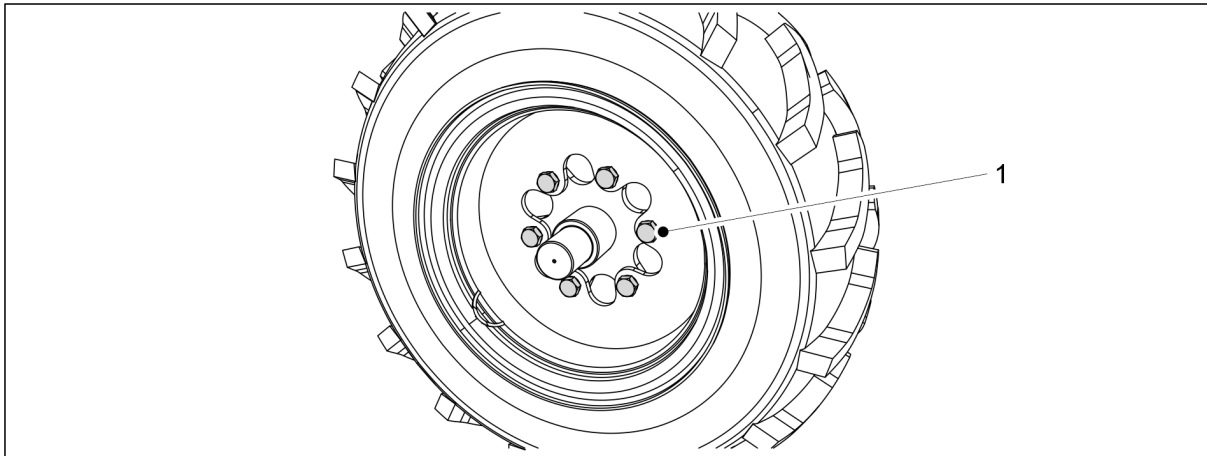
277. Unfastening the wheel bolts
